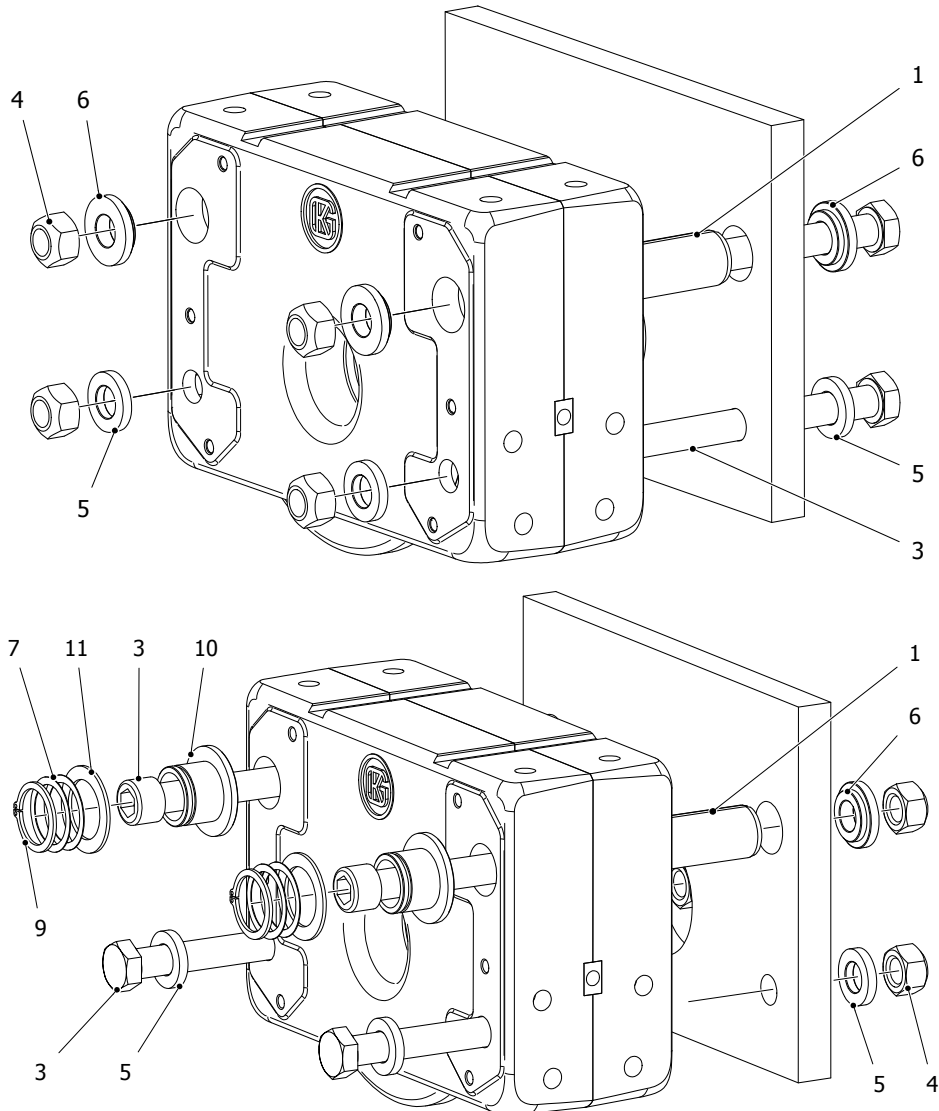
Side connection (top) and side connection for torque arm (bottom)
